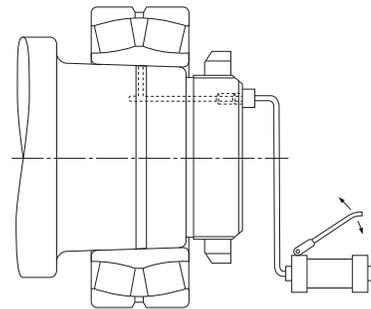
Removal Using an Oil Injection Hydraulic Pump
